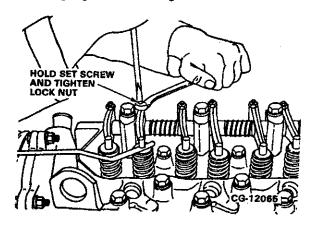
Tighten Valve Adjustment Screw Lock Nut
